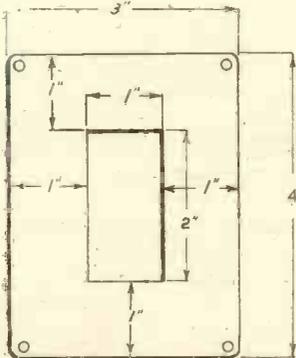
The aluminium mask should be cut to the dimensions shown
